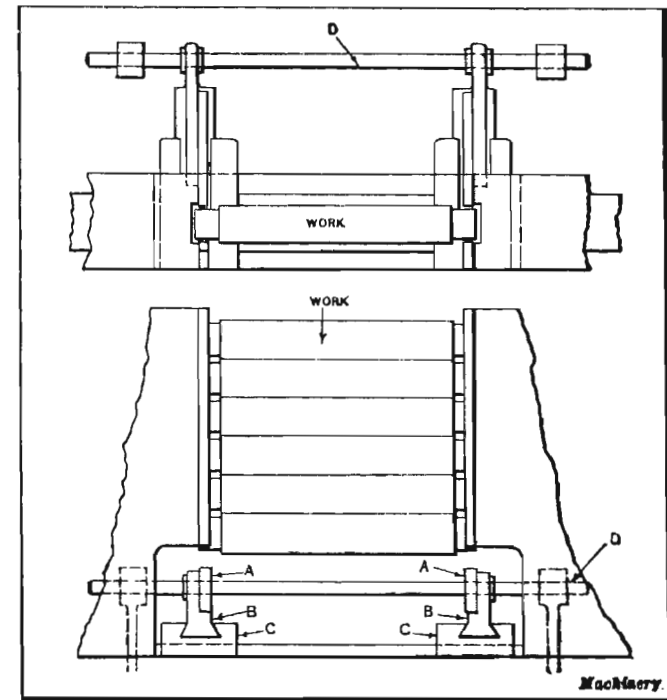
Arrangement of the Magazine, Carrier-slide, and Carrier on an Automatic Machine
